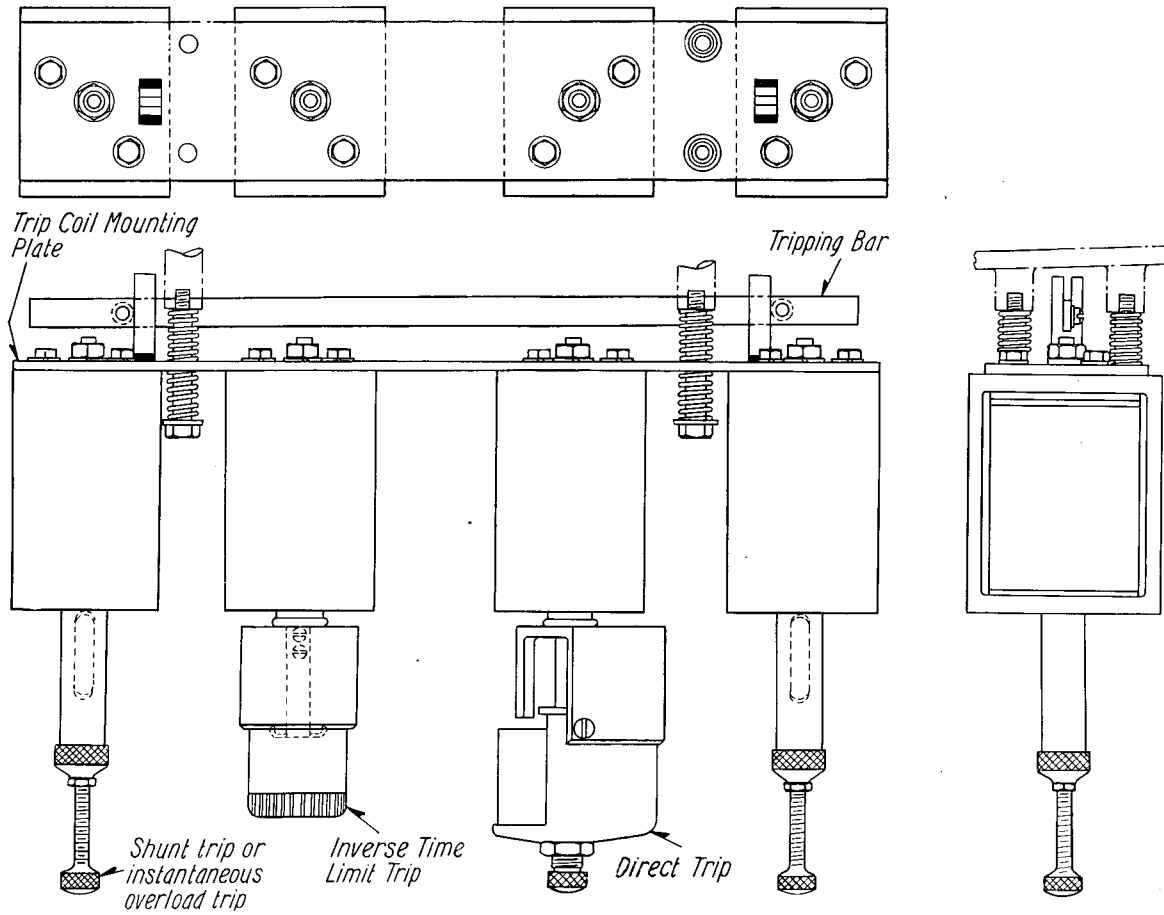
TRANSFORMER TRIP ATTACHMENTS AND MOUNTING PLATE
